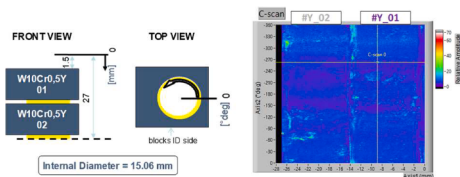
Blocks #Y_01 and #Y_02 after OFHC-Cu casting and UT C-scan in the Cu interlayer with bore hole machined to 15.06 mm.
